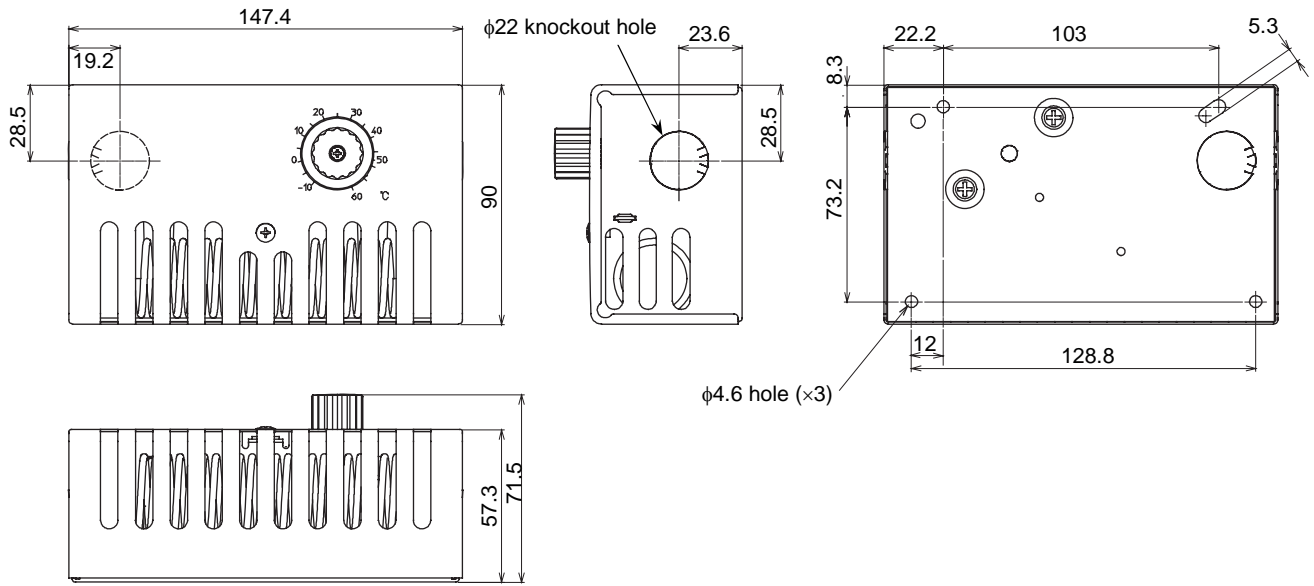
Dimensions of Model TY6300Z5000 (mm)
